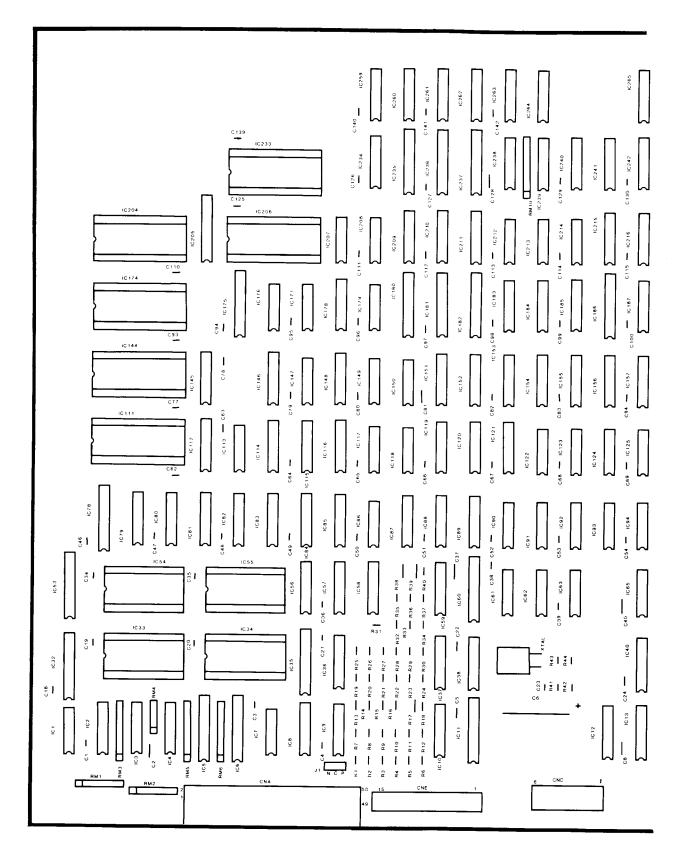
TX-1 Graphics PCB Assembly A042019-21 A
